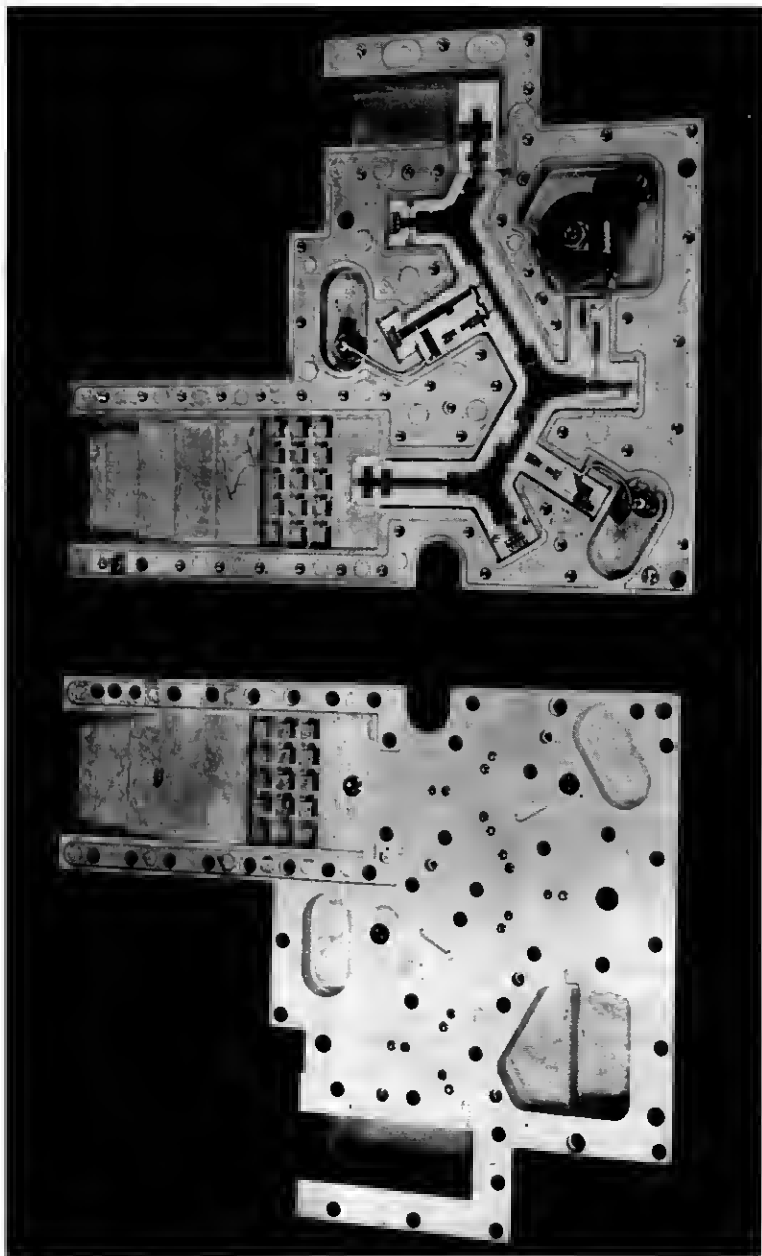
Pictorial view of open die-casting showing strip-line circuitry.
